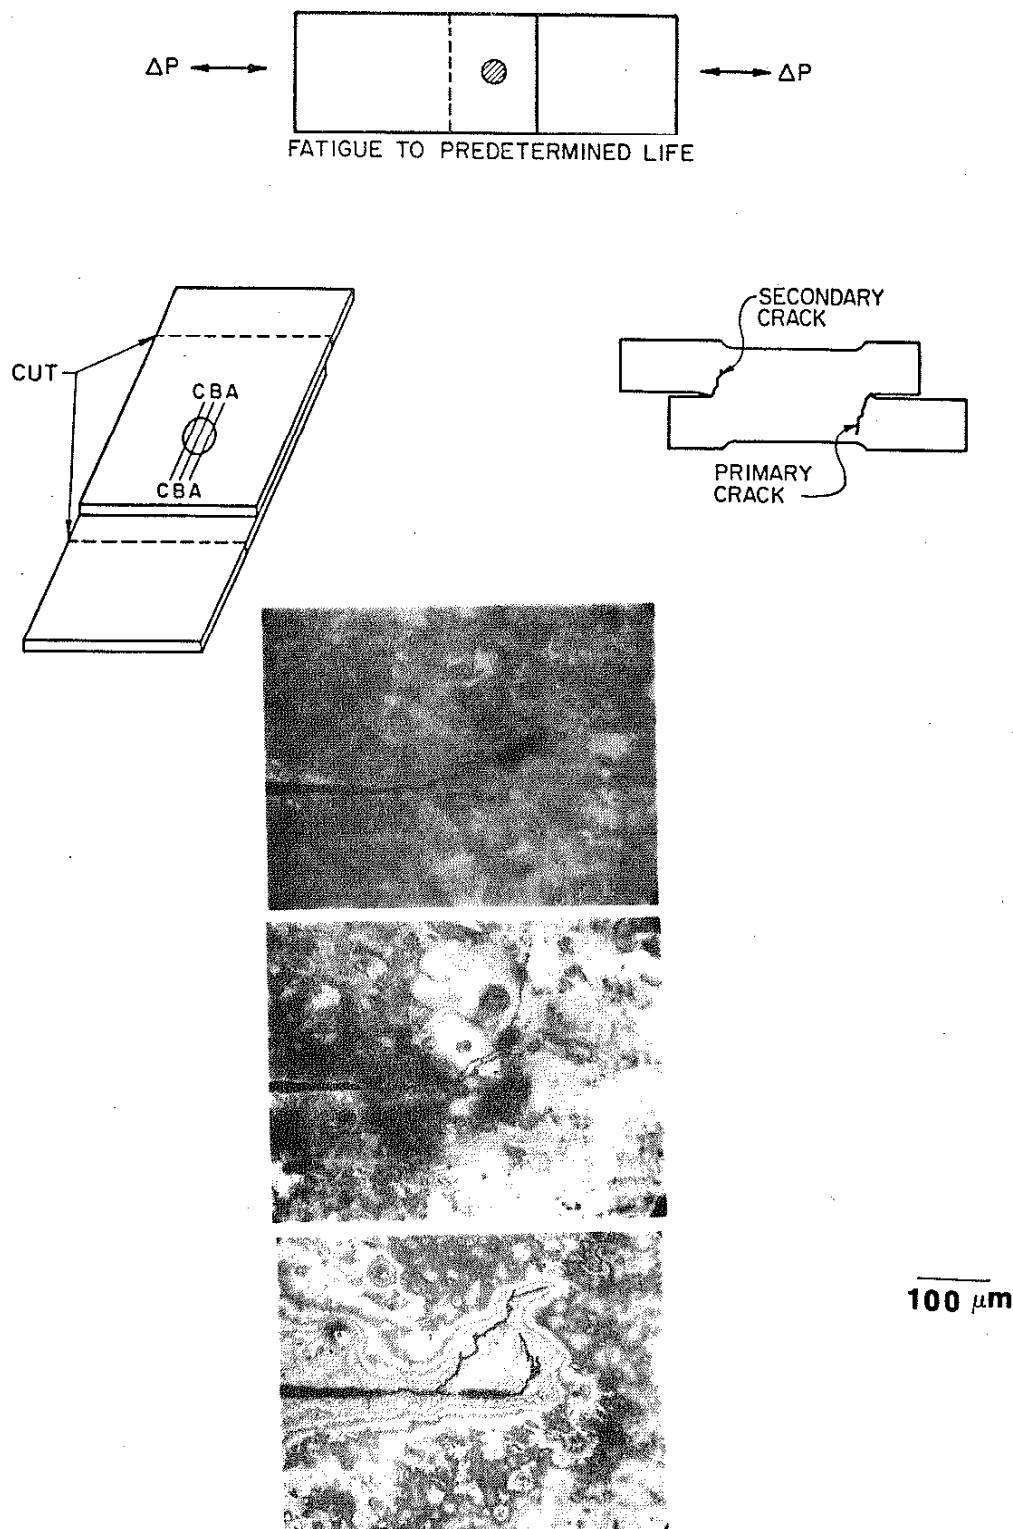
Schematic of the Sectioning of Companion Specimens. Successive sections (AA, BB, CC...) are exposed by polishing through the nugget which reveal the shape and depth of the fatigue crack (see lower photographs).
